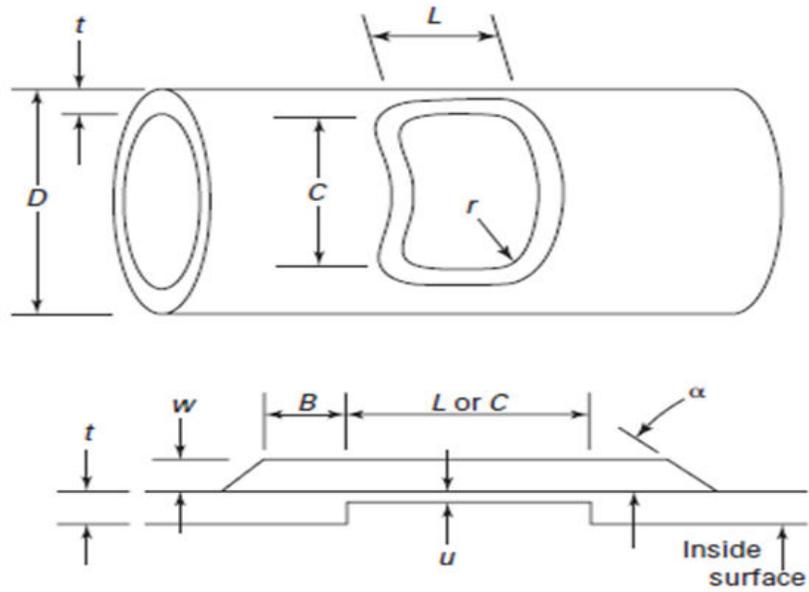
Geometrical Dimension of Weld Build Up [31]
